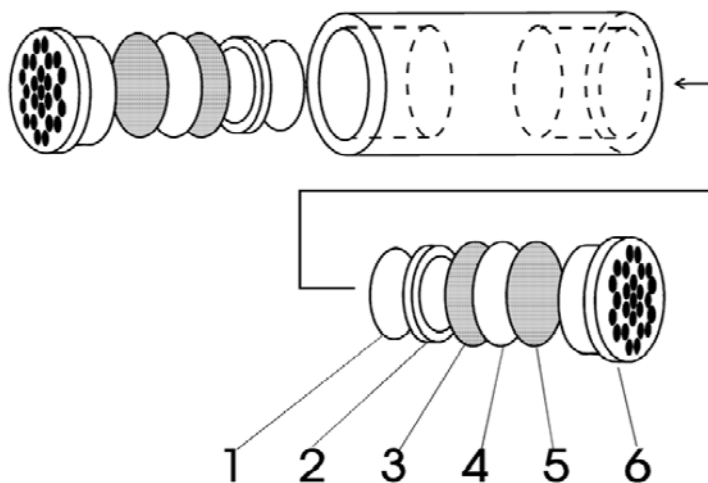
Ogawa sampler assembly: 1) solid pad 2) pad retaining ring 3) stainless screen 4) coated collection filter 5) stainless screen 6) diffuser end cap
